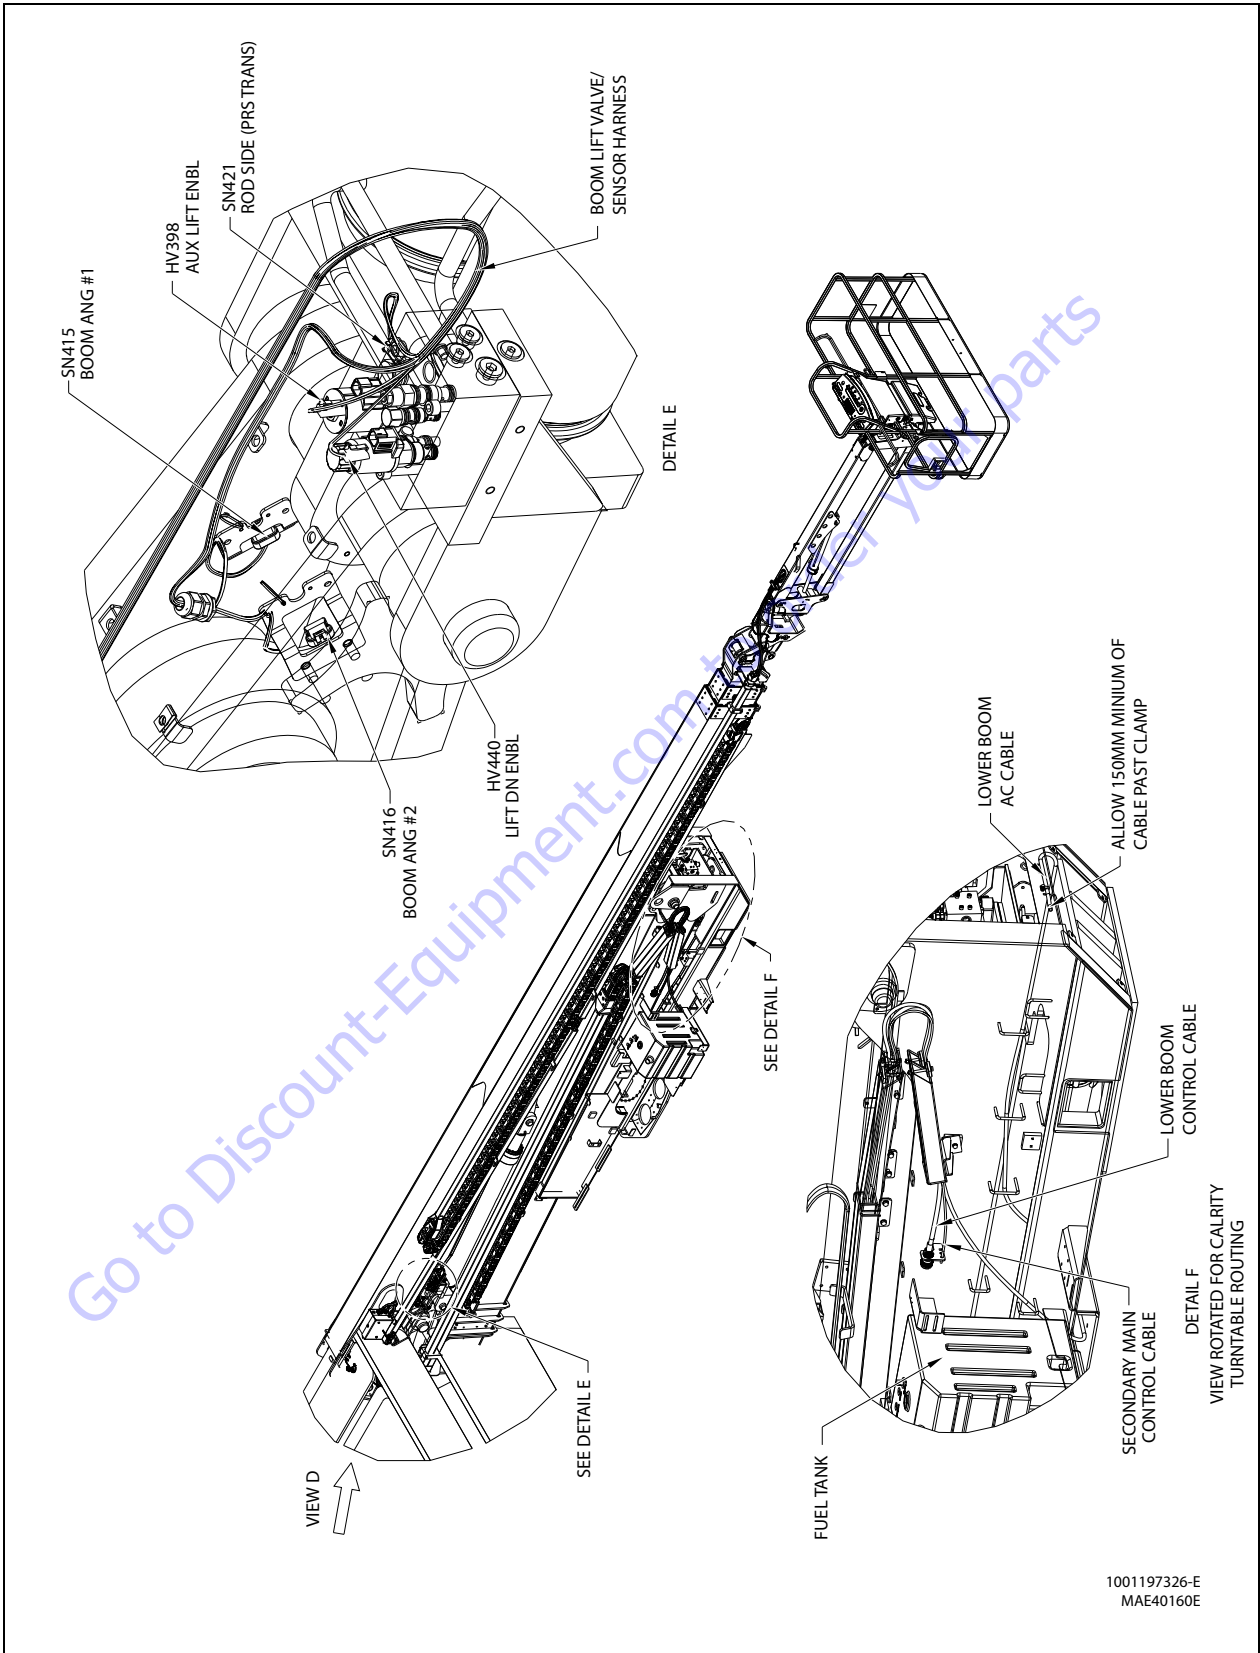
Boom Electrical Installation (ANSI) - Sheet 2 of 5
